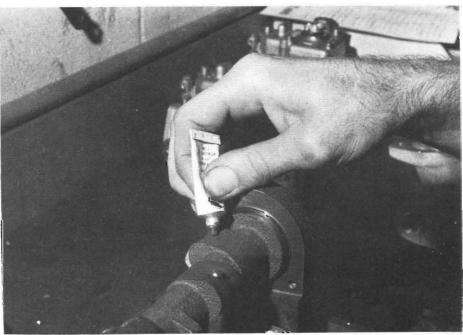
CAM FOLLOWER TO SPRING RETAINER CLEARANCE
